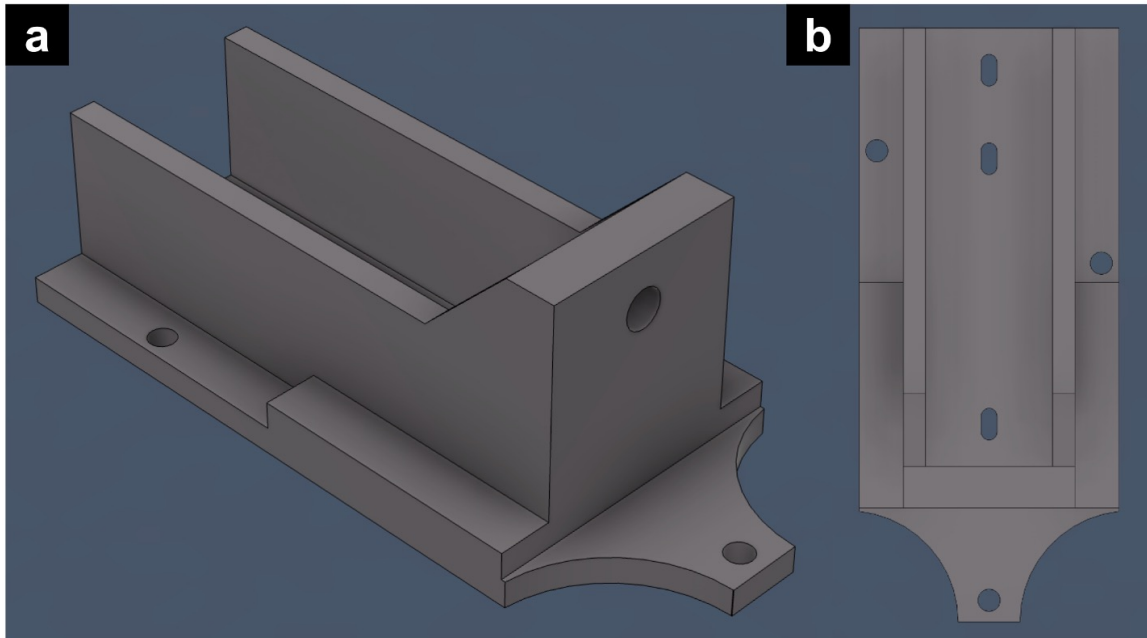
Bushing holder CAD. (a) Orthographic view of bushing holder design and (b) top-down view revealing hole positions.
